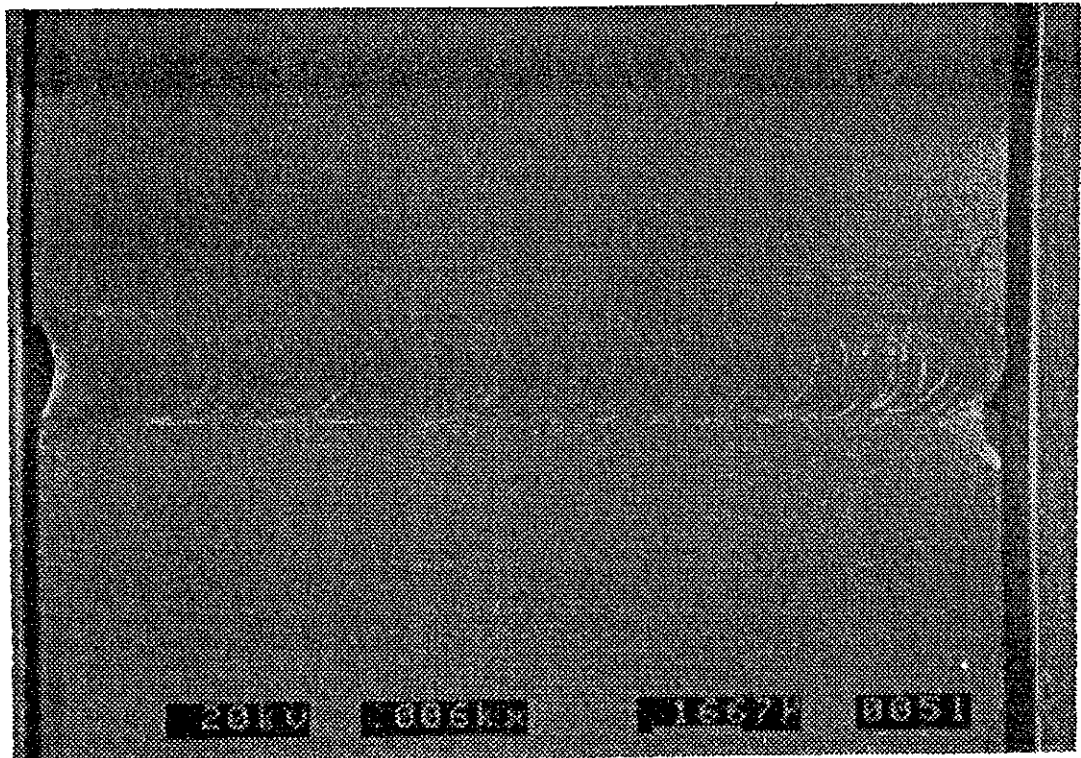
Laser weldment of irradiated (5dpa) and unirradiated SS 316LN, 1 mm thick
